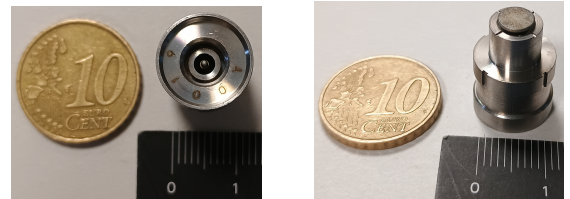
Top and bottom views of the Elettra 2.0 pickups manufactured using glass sealing technology.
